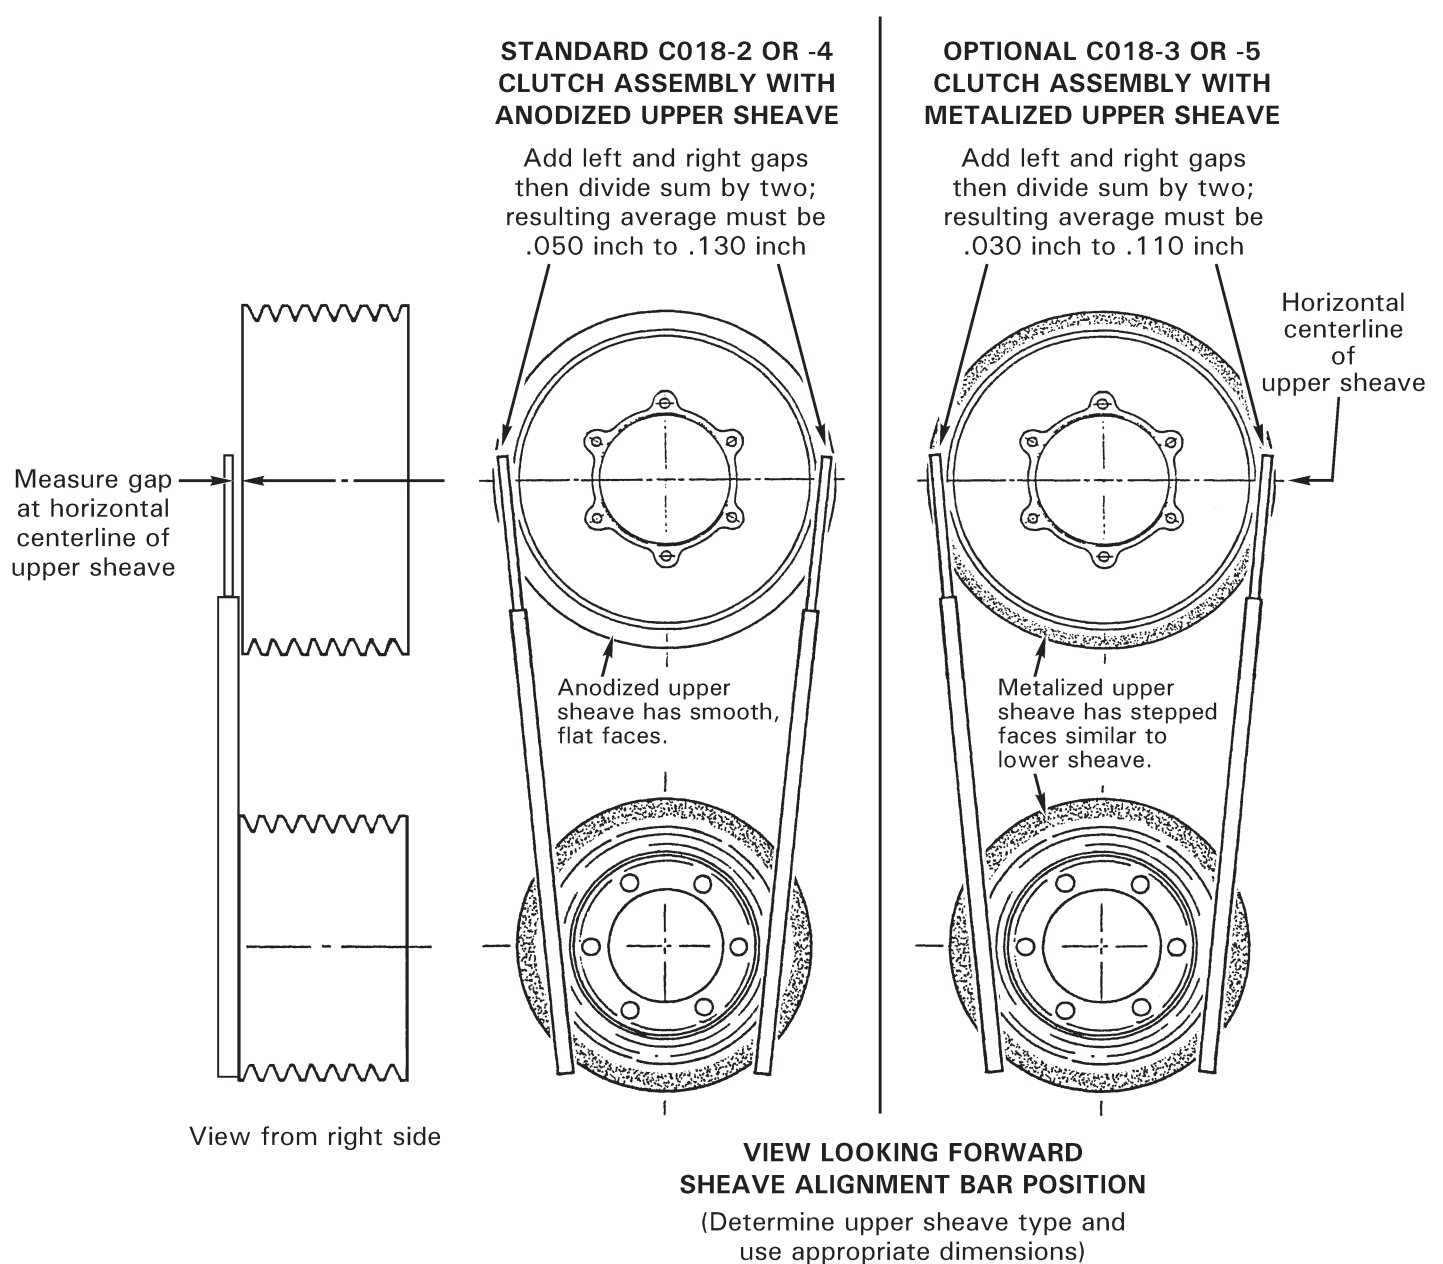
SHEAVE ALIGNMENT DIMENSIONS
